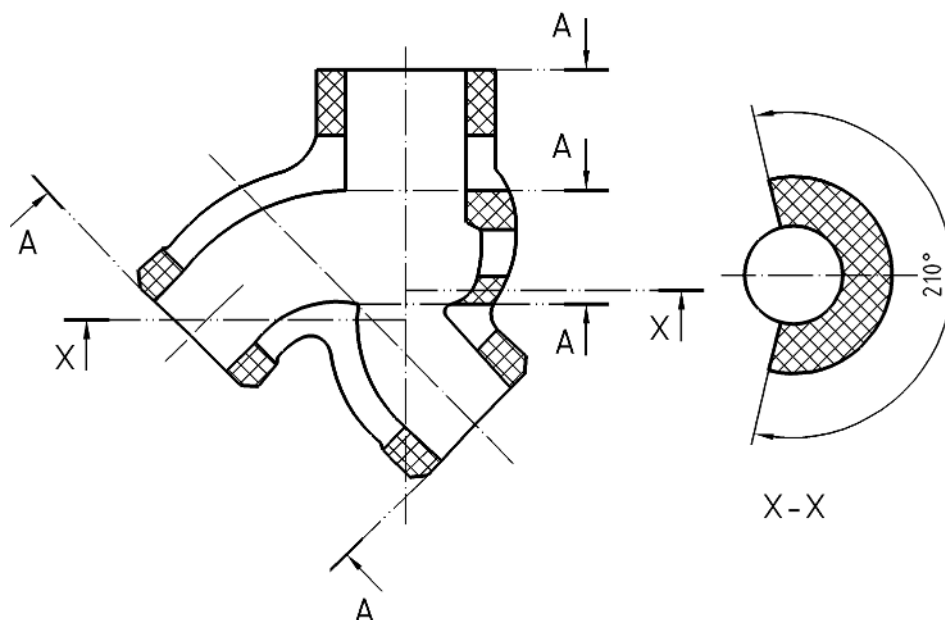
Typical casting section showing required radiographic examination of elbow down valve body (pressure seal bonnet)
